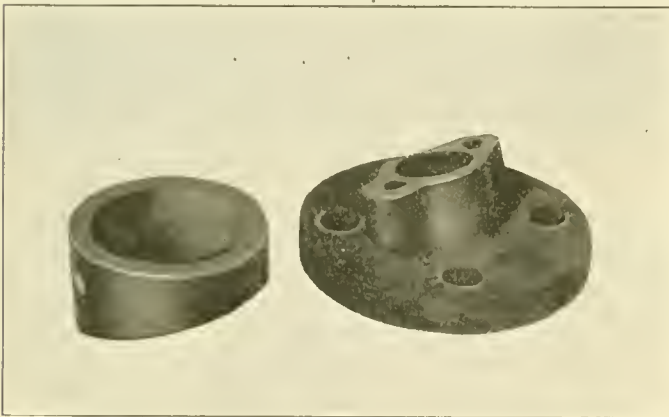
Throttle Rod Stuffing Box and Jig Used in Drilling Stud Holes
